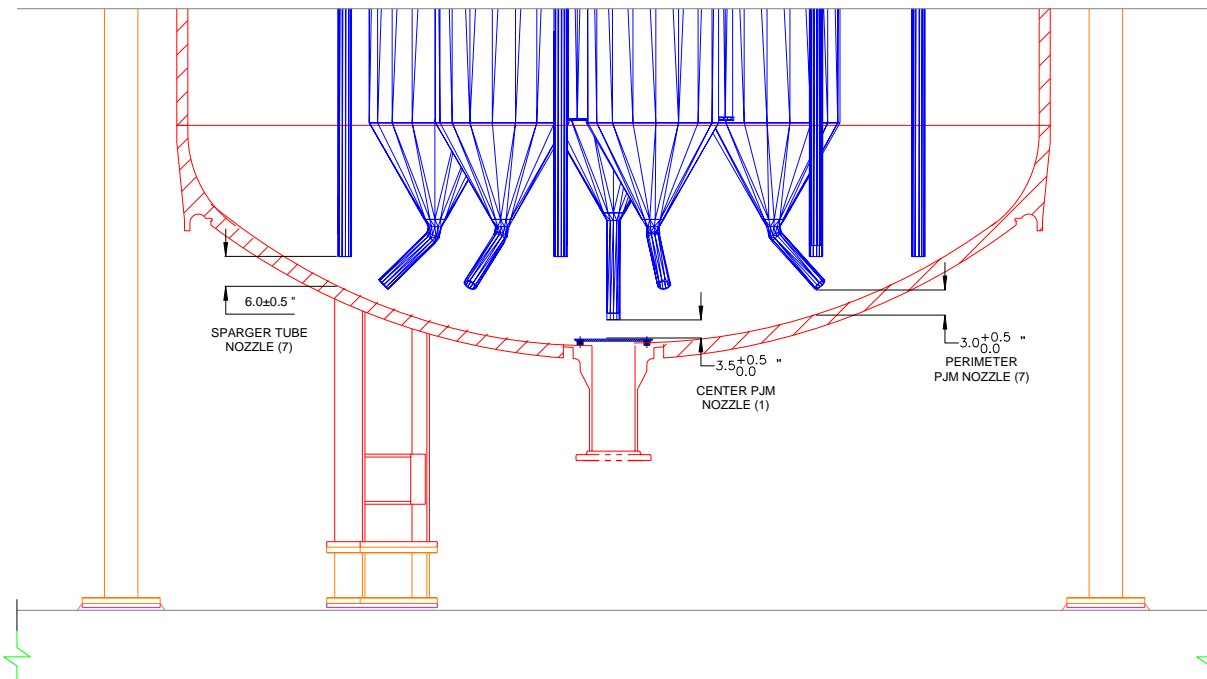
Drawing Showing the PJM and Sparger Locations in the HSLT Tank
